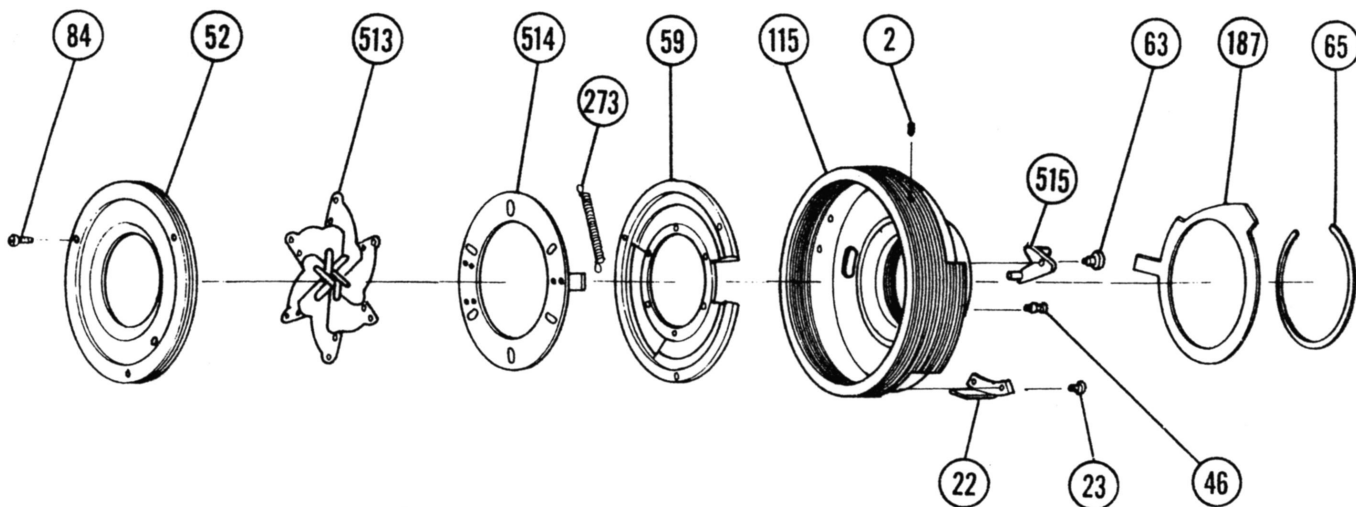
Diaphragm Housing Assembly, Pentax K Mount
